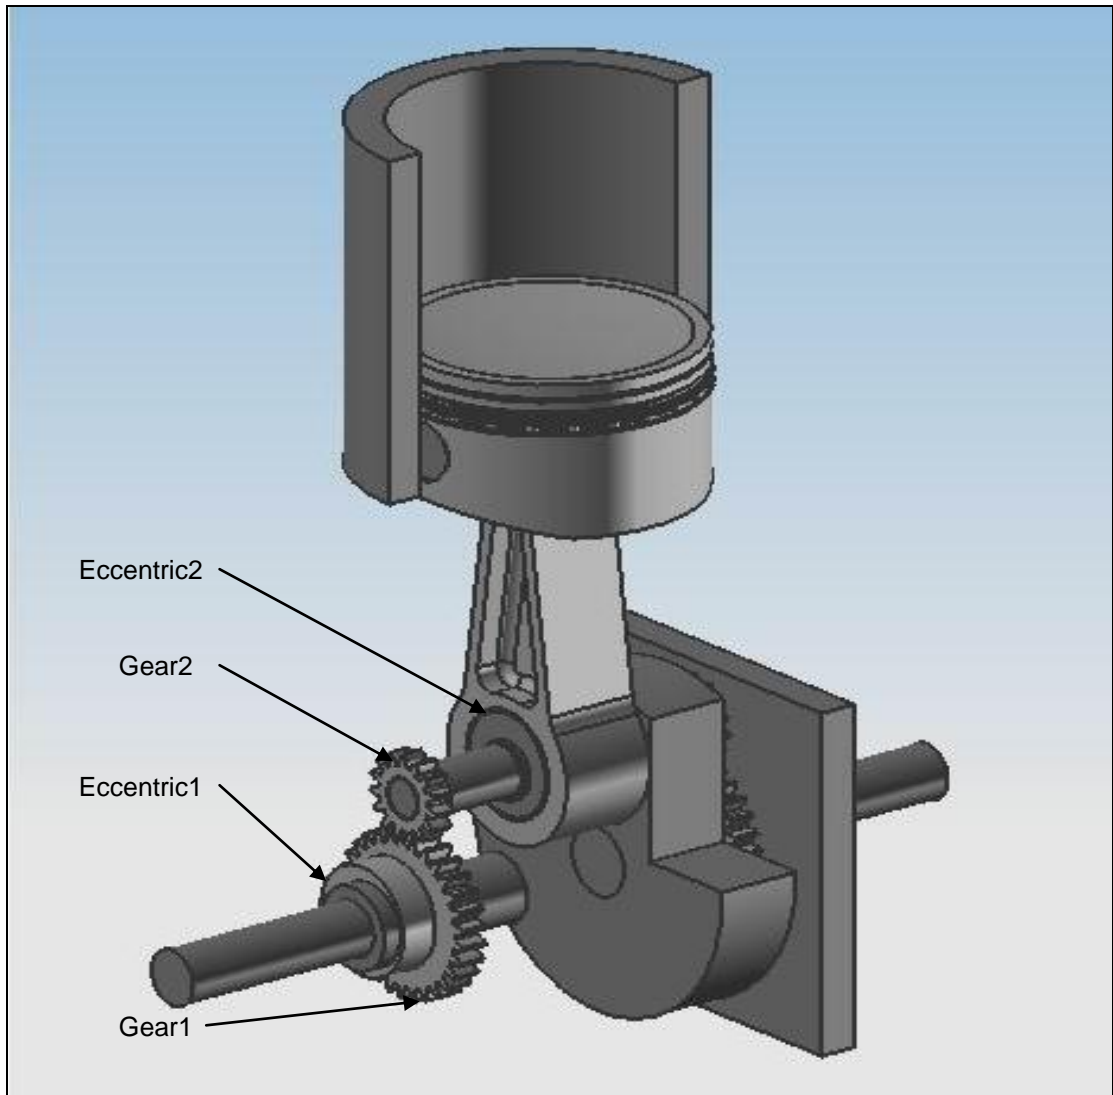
Final Concept (housing and gears 3 omitted for clarity)
